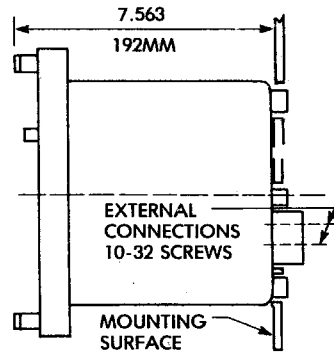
Type C1 case relays recommended for surface mounting (side view) for panels no larger than 0.188 in. (5mm) thick
